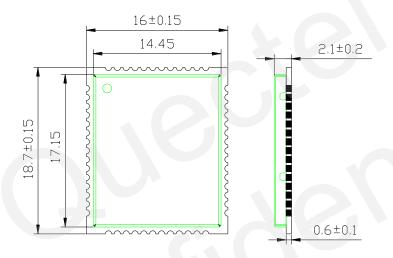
MC60 Top and Side Dimensions (Unit: mm)
